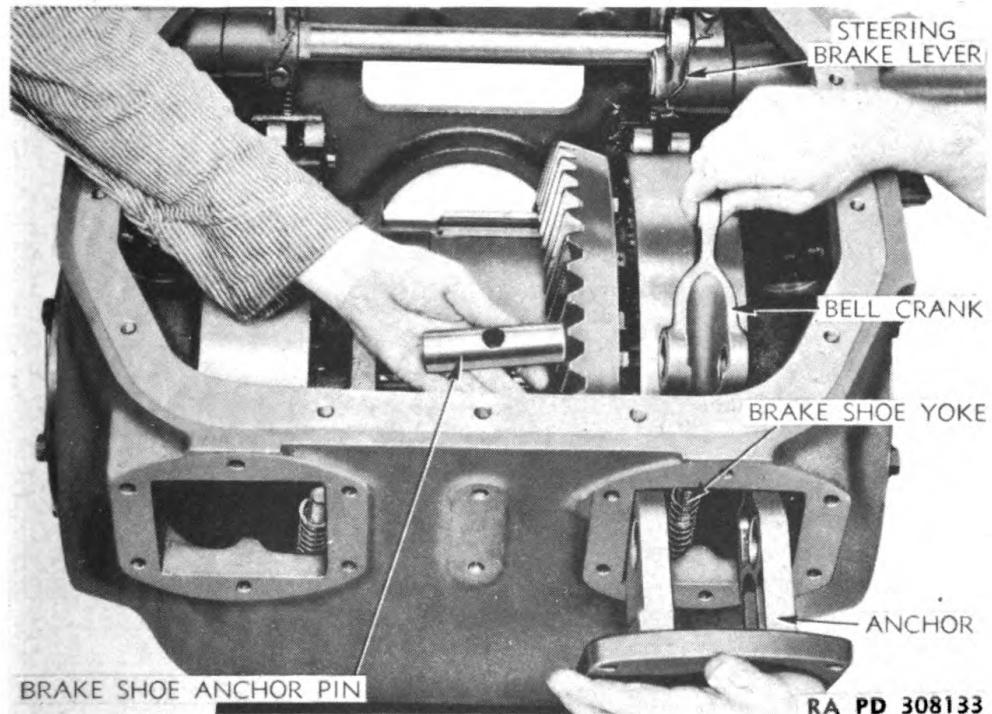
Removing Steering Brake Anchor and Bell Crank
